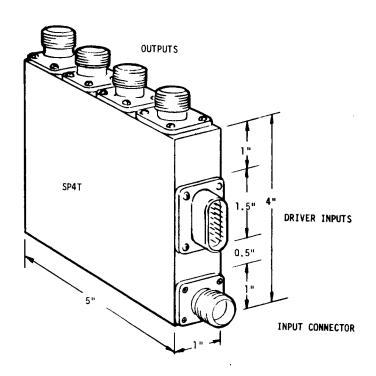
Single 1  $\times$  4 Switch Module Dimensions
